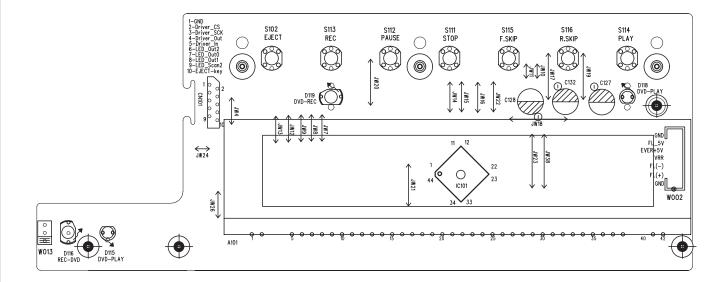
EU03A Front (R) PC Board (Top side)
